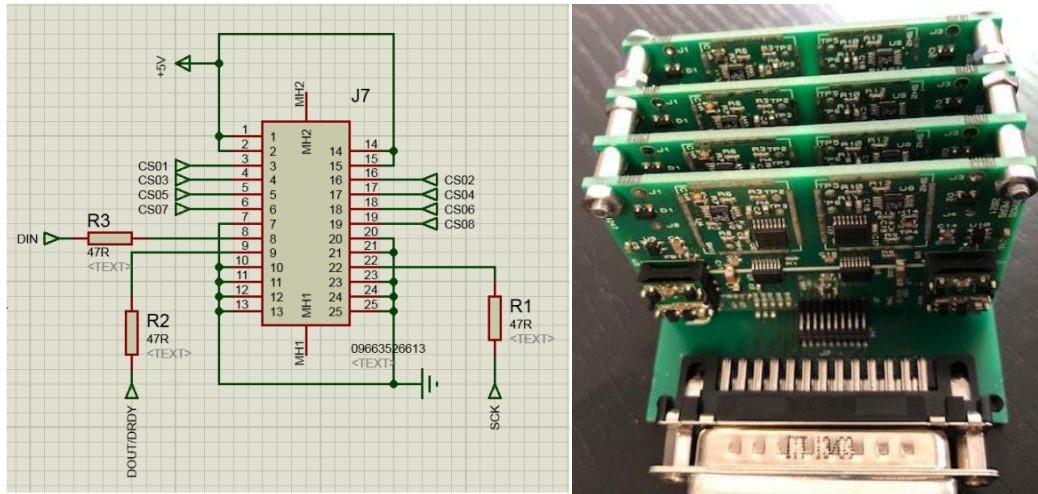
Left panel: Connection of the hub card. Right panel: photograph of the measurement cards assembled together with the hub card.
